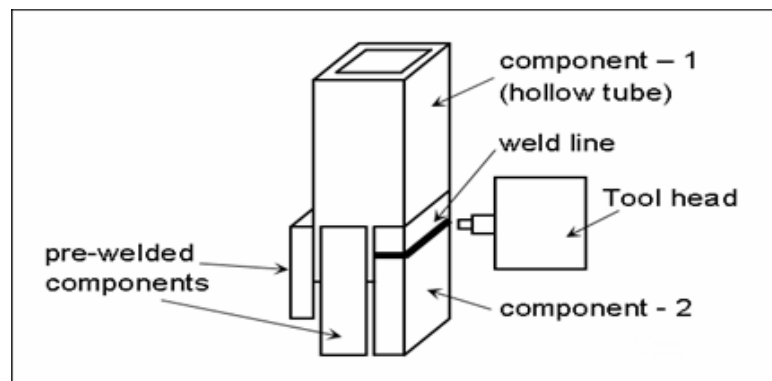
Joint between Thin Walled Hollow Tube and Sheet
